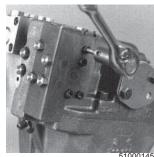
Remove Fig. 50-129 - Remove PCOR•PC Plug
